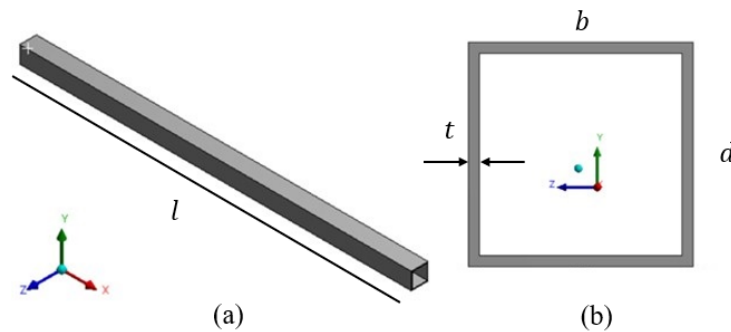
Dimensions of the cantilever beam (a) isometric view of the beam, (b) cross-section
